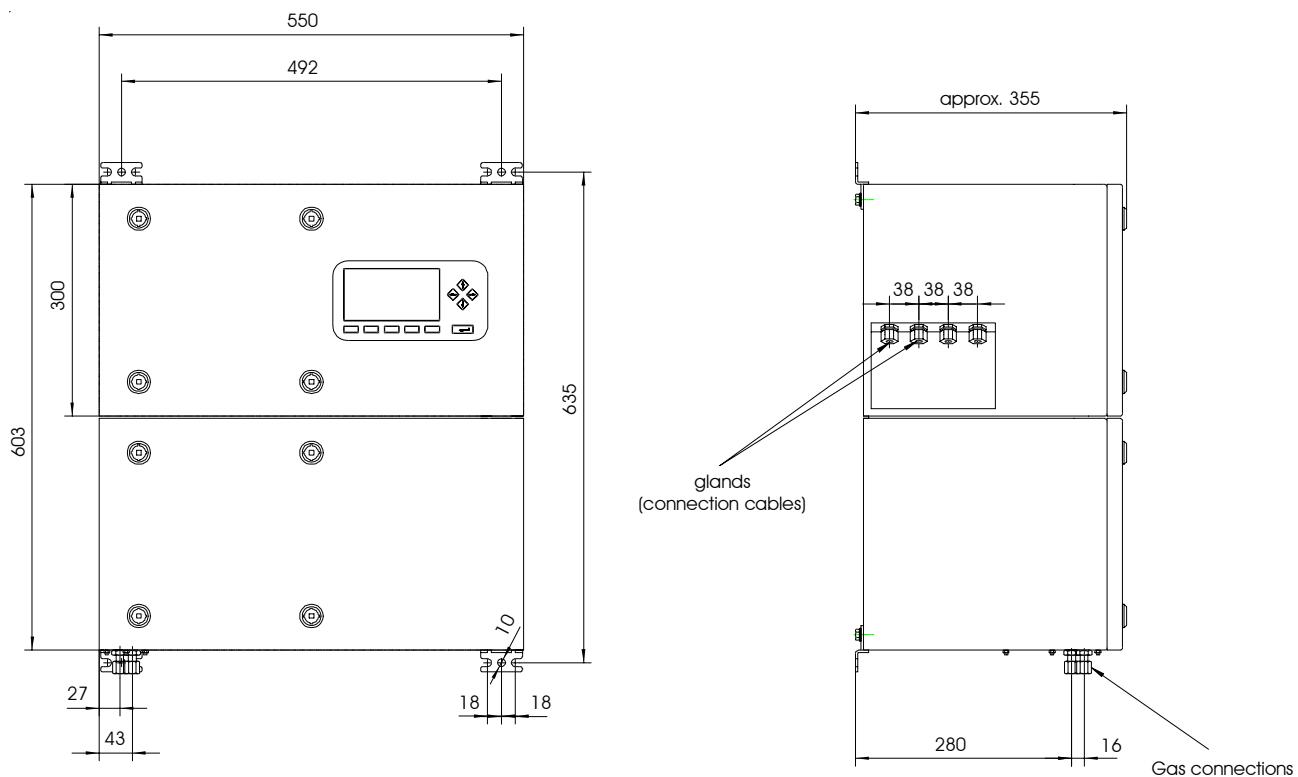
Dimensional sketch / Drill drawing MLT 2 Dual housing version [all dimensions in mm]
